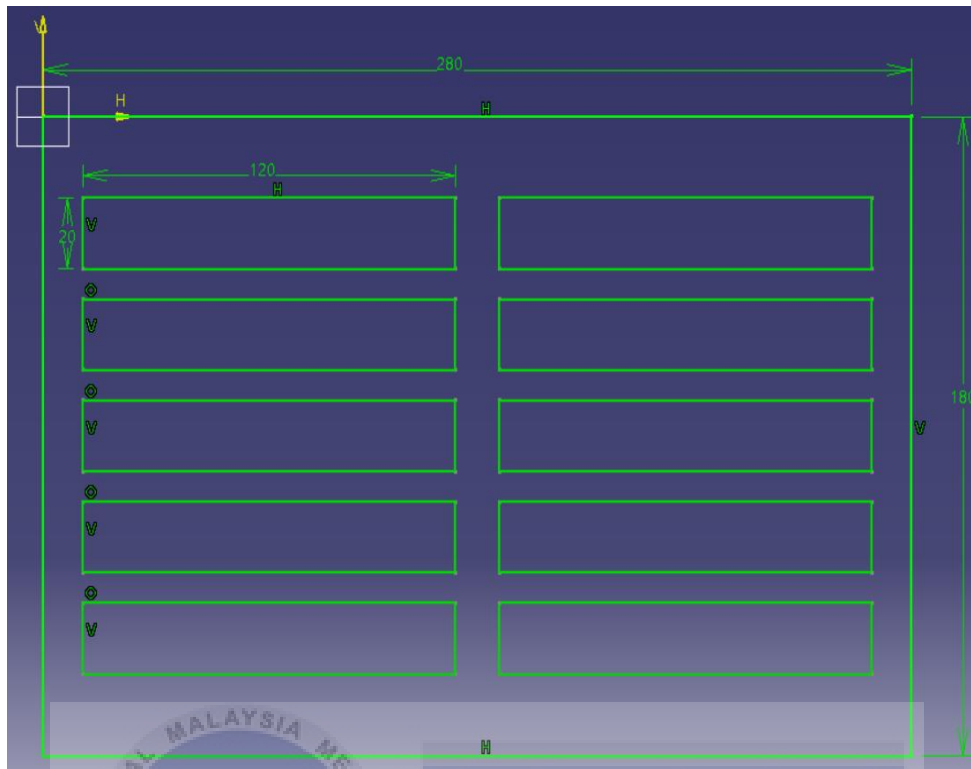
The dimensional design of specimens for tensile and flexural testing
